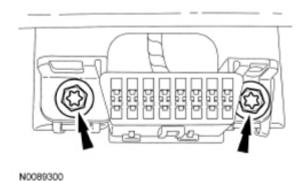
Locating Data Link Connector Screws Courtesy of FORD MOTOR CO.
